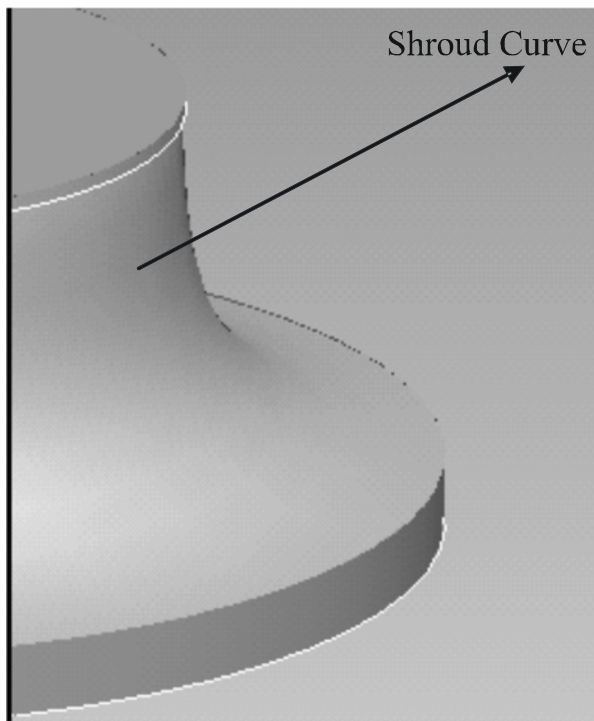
WORK PIECE (BLANK) OF IMPELLER
